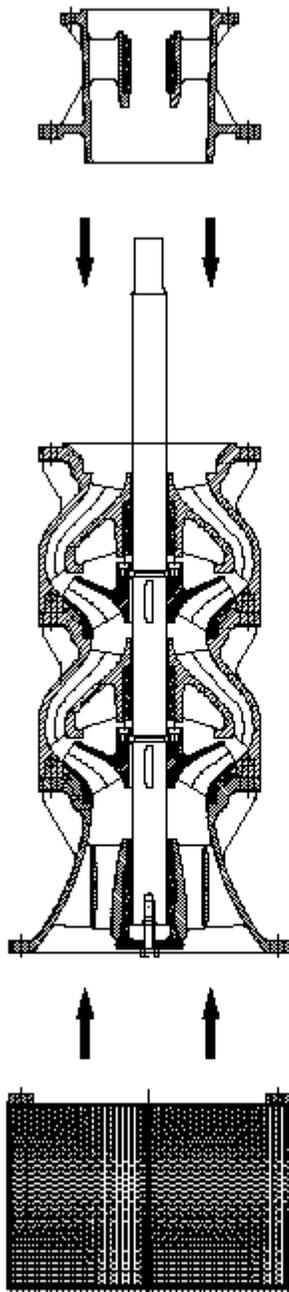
ASSEMBLY OF BOWL ASSEMBLY.
